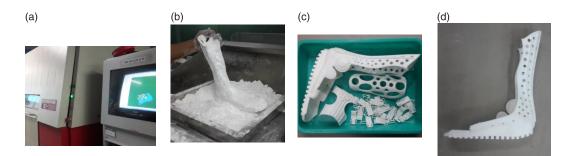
(A), SLS machine used to build the part. (B), Part being removed from the powder cake. (C), Nylon Parts made in SLS. (D), The bottom part of the cast.
